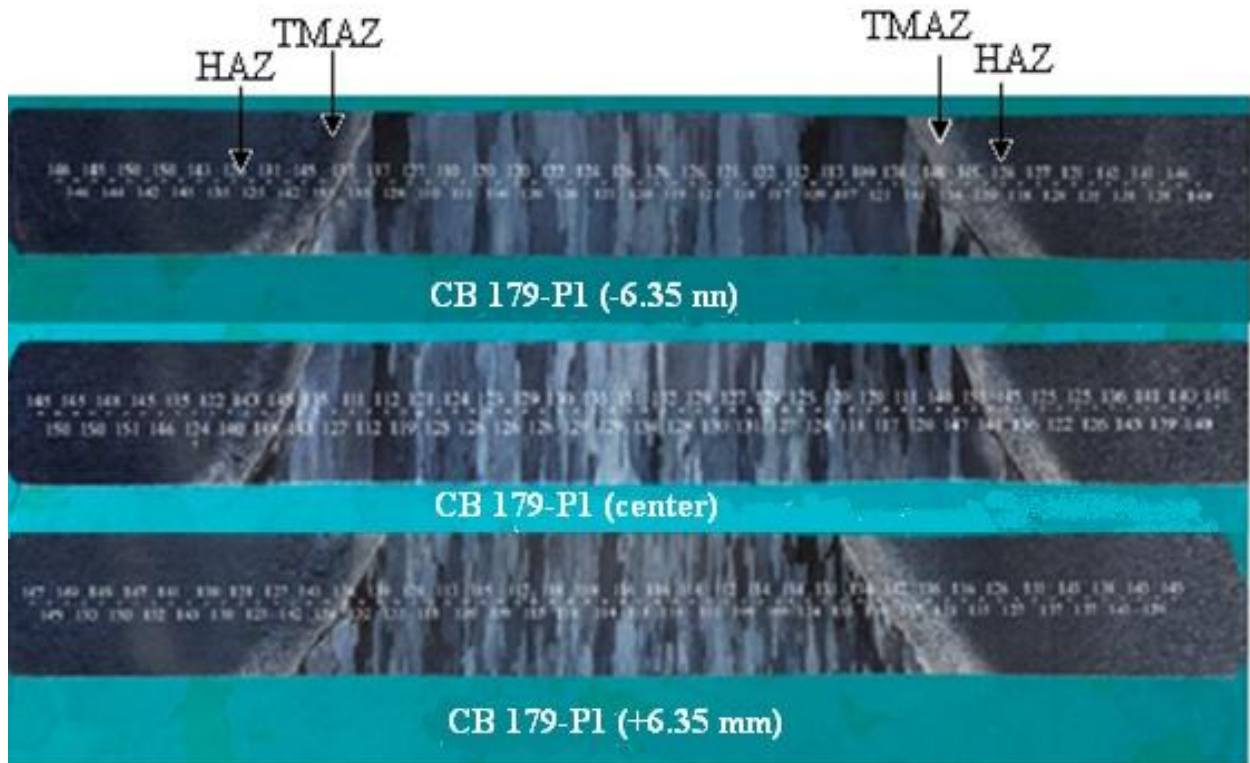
Cross-section macrographs of CB-179-P1 post weld heat treated plug welds of M3 plug major diameter side.
